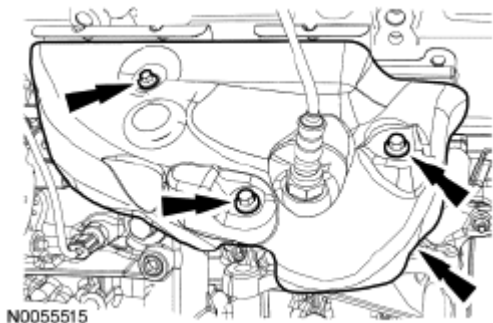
Locating LH Exhaust Manifold Heat Shield Bolts
